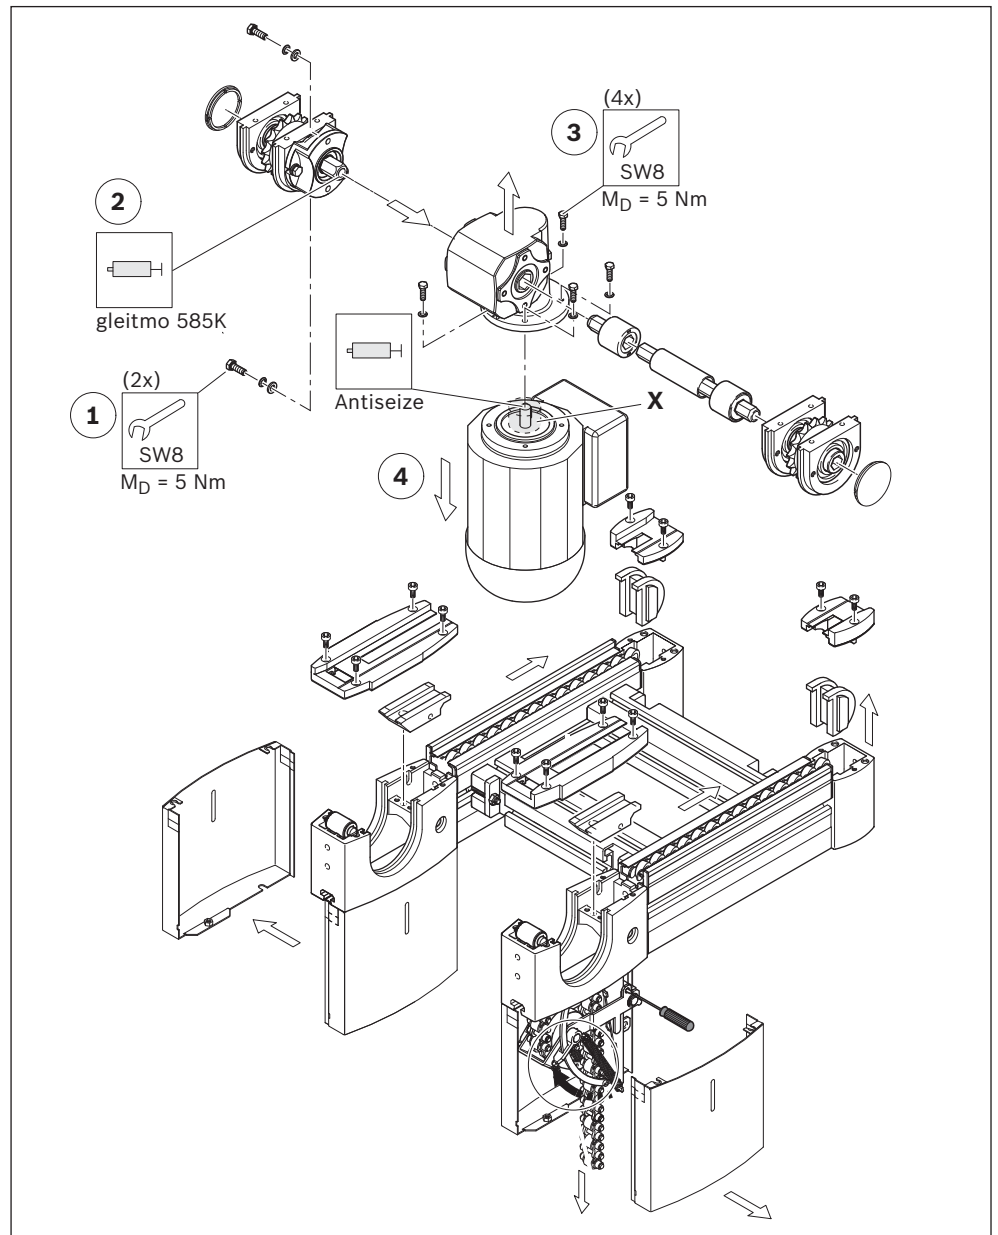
Exchanging the motor and/or gear, motor mounting (MA) = M
